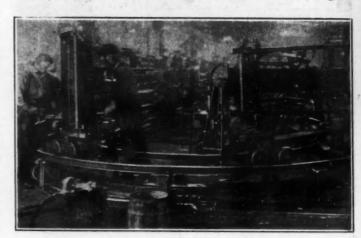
FRAME IN A REVOLVABLE FIXTURE ON AN ENDLESS CONVEYOR A Cradle Holds All the Members in Their Correct Relative Positions
